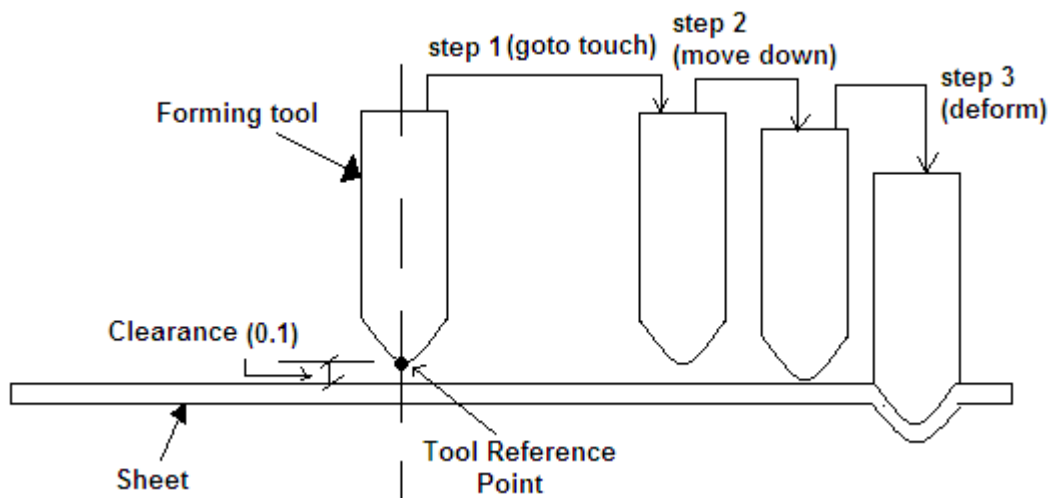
Sheet tool assembly and steps for tool motion on sheet
